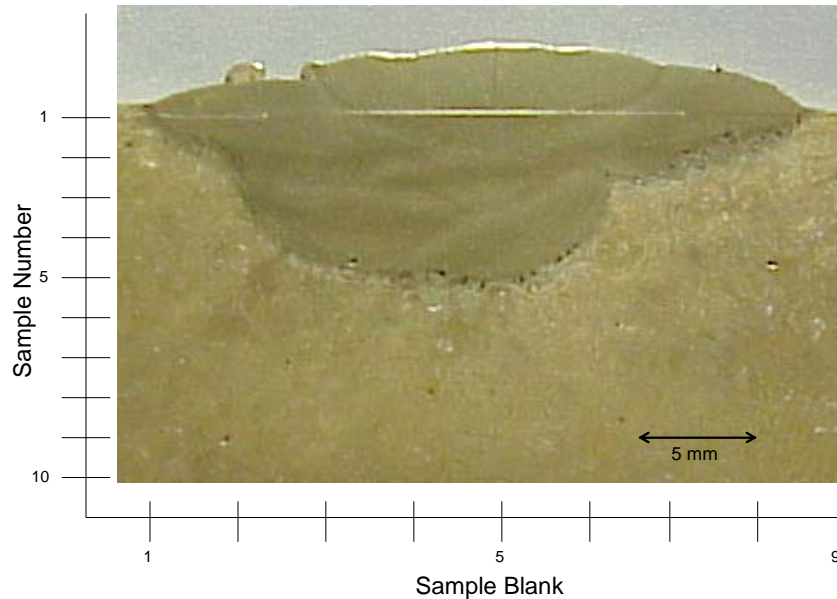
Schematic of Weld Pool, HAZ and Base Metal Illustrating Six Weld Passes and the Layout of the Locations of the Tensile Specimen Relative to Locations in the fusion weld. Highest ductilities were observed in the weld pool.
